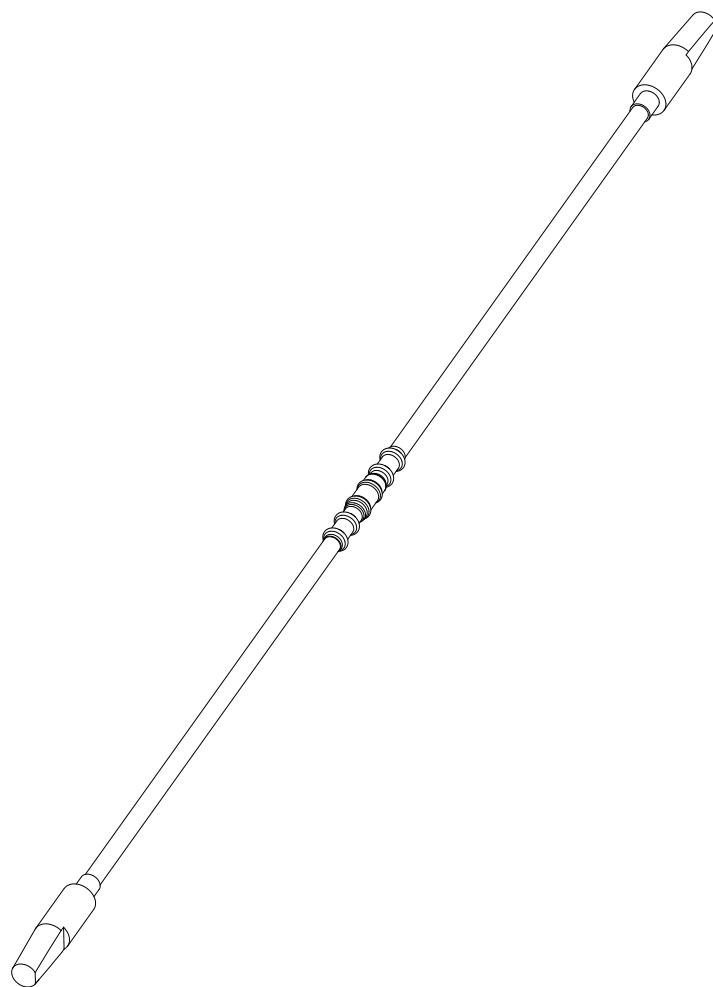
Silo Support Assembly (6600-0853-800)
